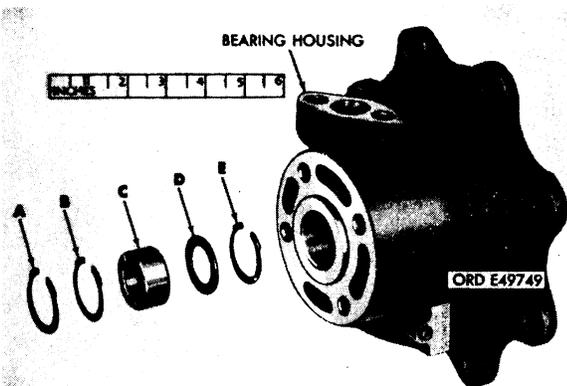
REMOVING OR INSTALLING RETAINING RINGS, SLEEVE BEARING, AND THRUST WASHER - TURBOCHARGER 10935279.
